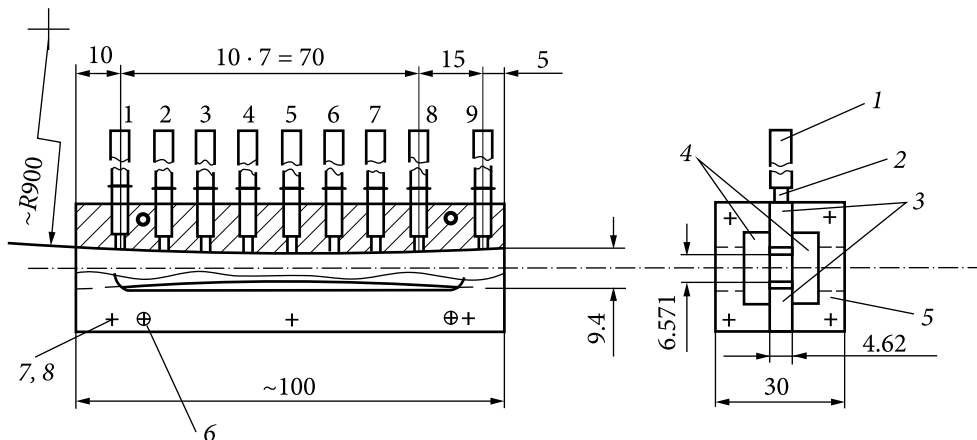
Nozzle: 1 — tube $\varnothing 4$ mm; 2 — tube $\varnothing 3$ mm; 3 — profile plates; 4 — flat plates; 5 — case; 6 — pin; 7 — screw; 8 — nut
